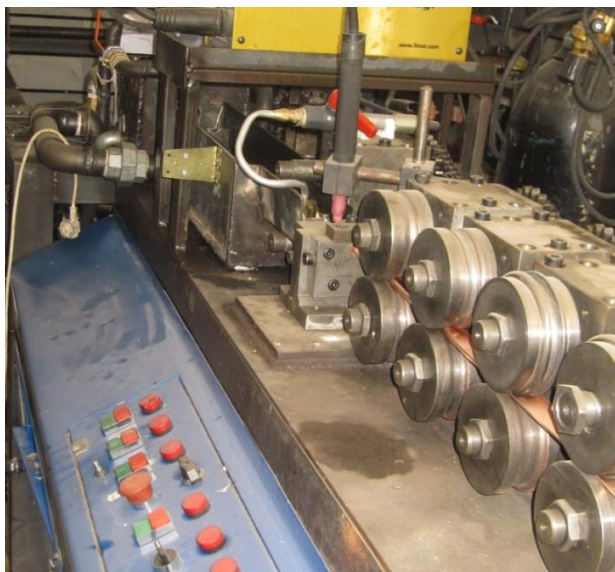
Devices for making copper clad aluminum bimetallic wire
